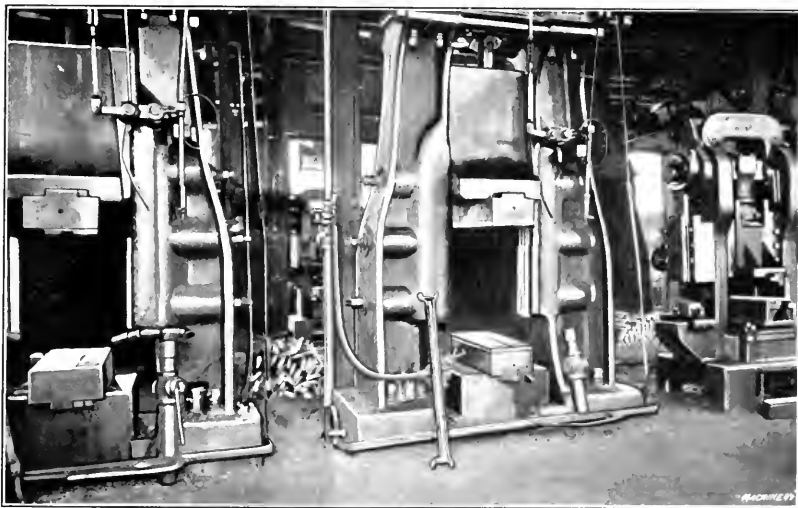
Steam Hammers and Trimming Press used in performing the final forging operations on the axle
